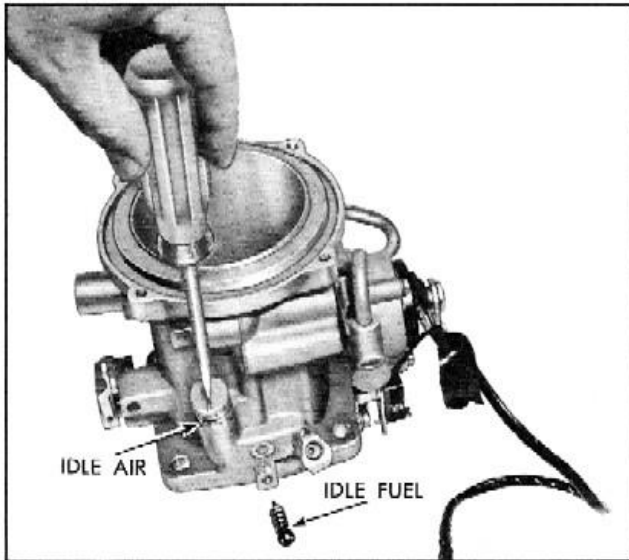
Removing Idle Fuel and Idle Air Adjusting Screws
